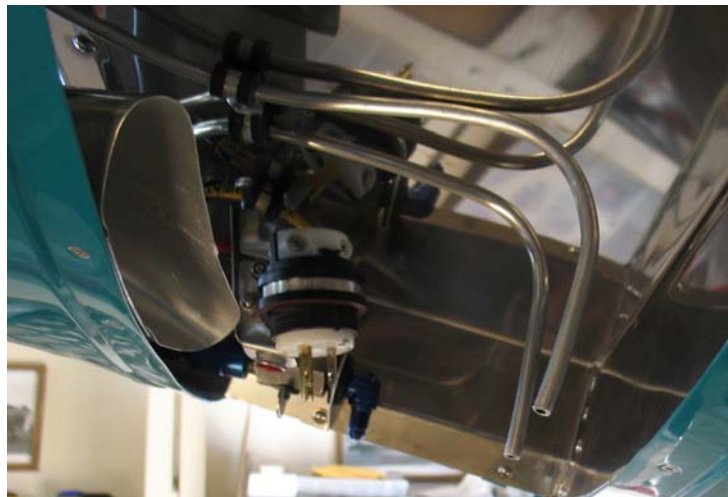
Shore power plug and indicator mounted on bracket in lower cowl opening
